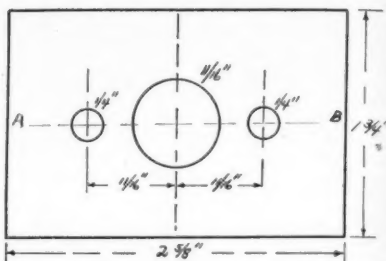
Material used—1 piece $1\frac{3}{4}$ " x $\frac{1}{8}$ " strap iron. Hook two jaws of common two jaw puller under sides A and B
